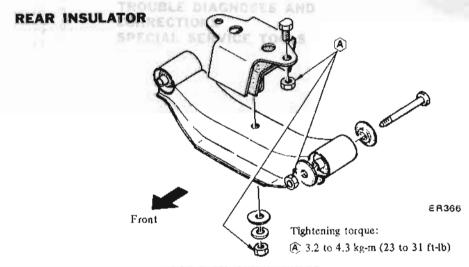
Rear Engine Mounting and Rear Insulator
